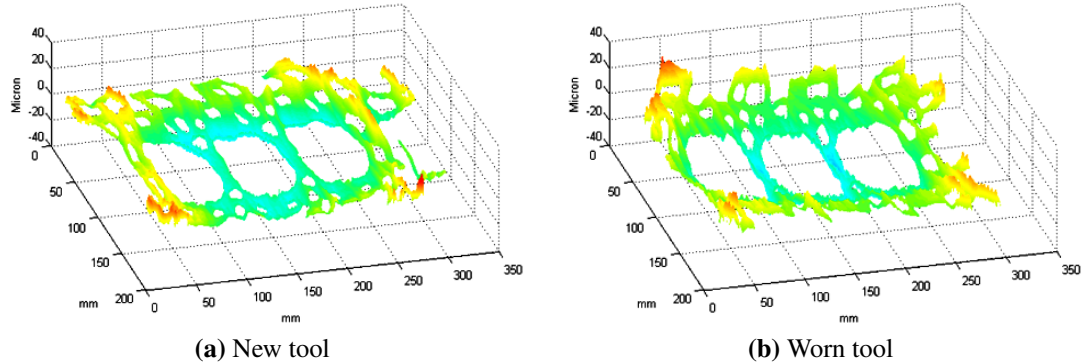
Engine head surfaces machined using (a) new tool and (b) worn tool
